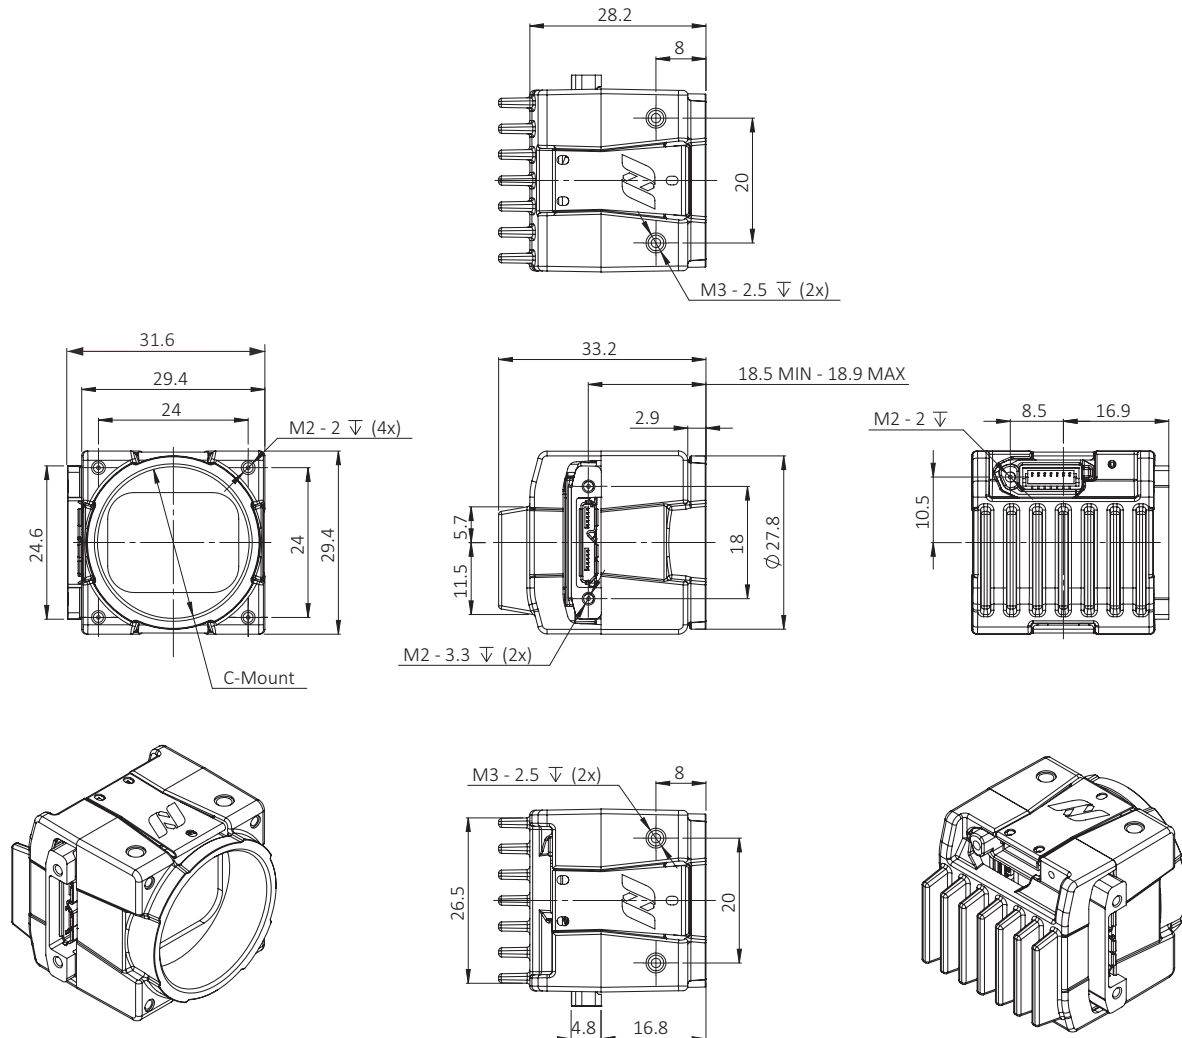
Dimensions for USB 90° closed housing CS-Mount
